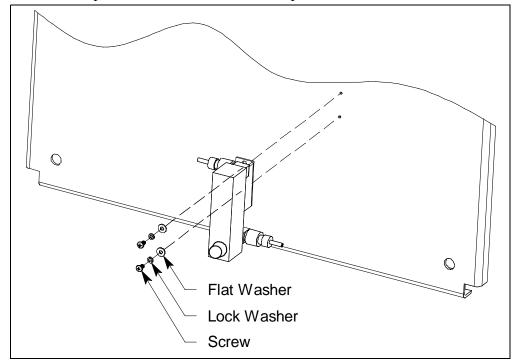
Attaching H₂S Dilution Air Flowmeter Bracket to Plate
